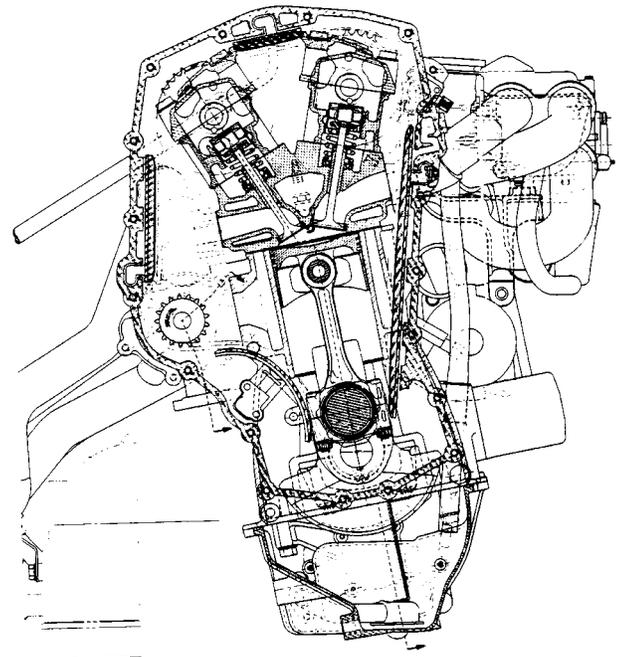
Oldsmobile Division Quad 4 with four valves per cylinder (1987).
